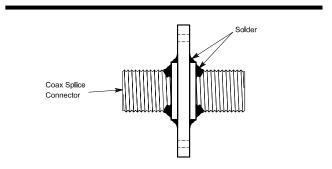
Feedthrough connector for coax line. An Amphenol 83-1J (PL-258) connector, the type used to splice sections of coax line together, is soldered into a hole cut in a brass mounting flange. An Amphenol bulkhead adapter 83-1F may be used instead.
